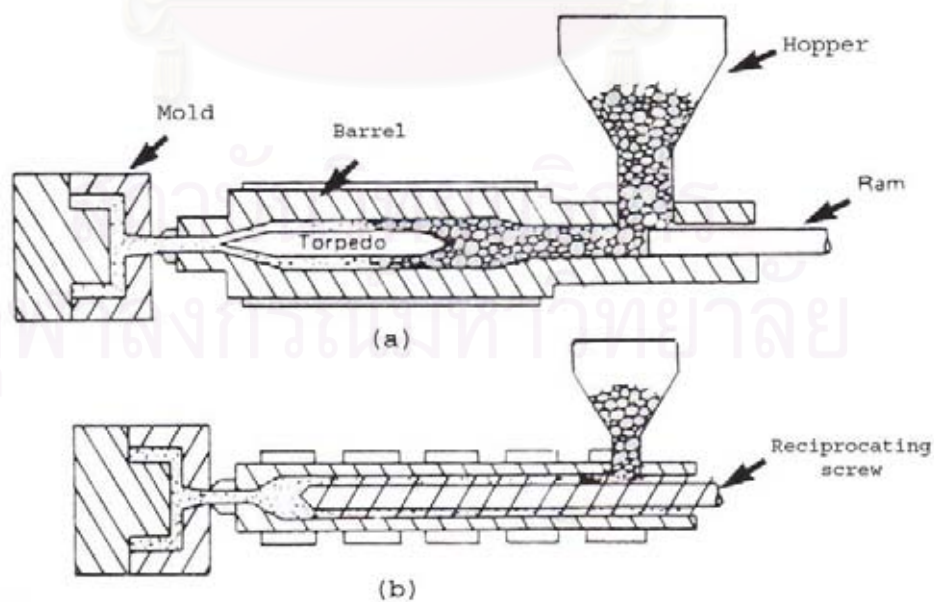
Sketch of (a) Ram-fed and (b) a Screw-fed Injection Molding Machines
